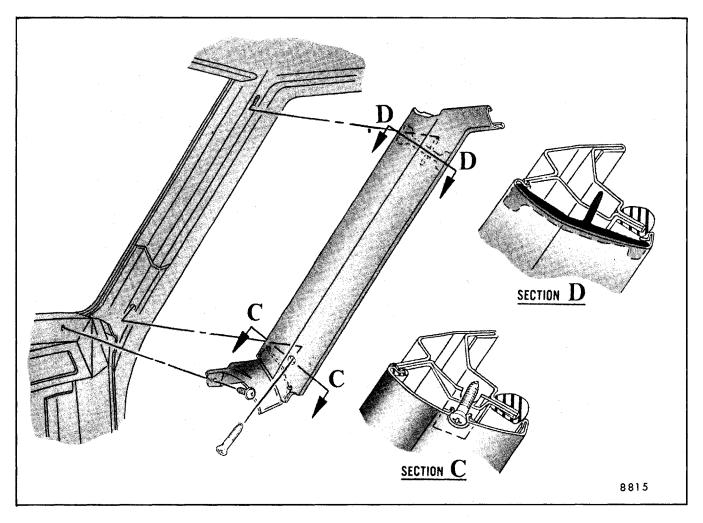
Windshield Side Garnish Molding - K Styles
